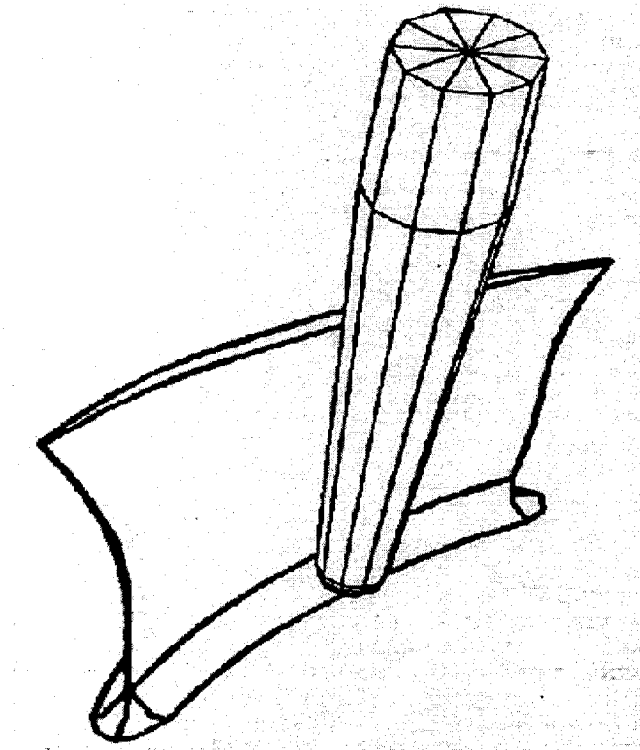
Schematic illustration of flank milling [Wu, 1995]
